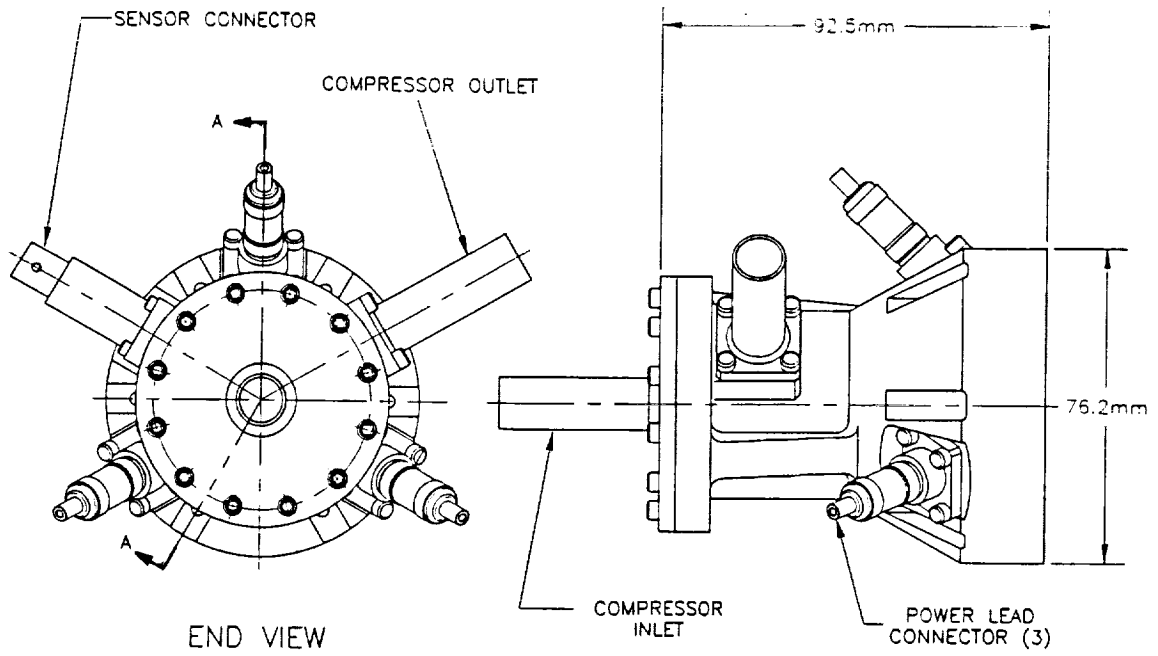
Outline Drawing of Engineering Model Compressor
